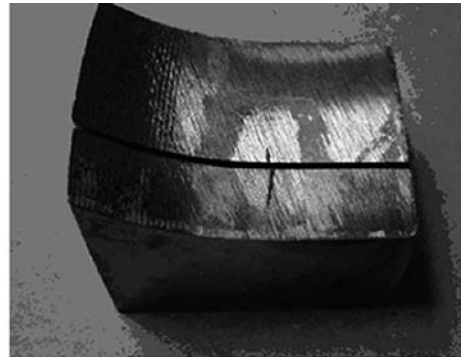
A large roll was found to have cracks on the outer and inner surfaces of the forging. These cracks were found during final inspection. During examination of metallographic sections taken from the roll, high-temperature oxides were found on the crack faces, strongly suggesting forging laps.
